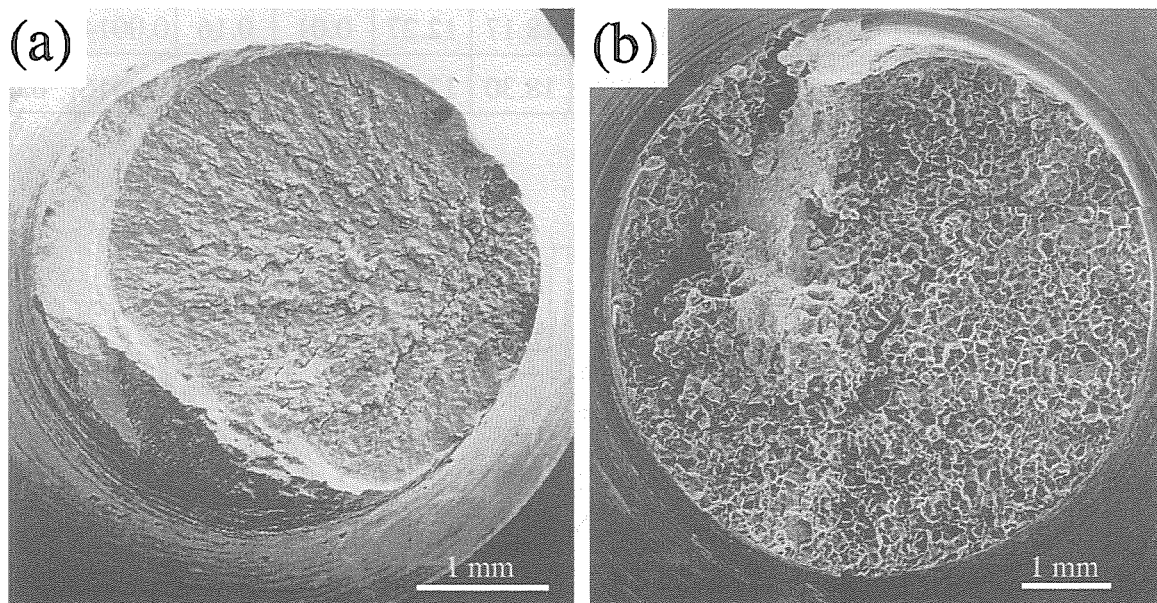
Fracture surfaces of SSRT specimens of alloy HP+C
